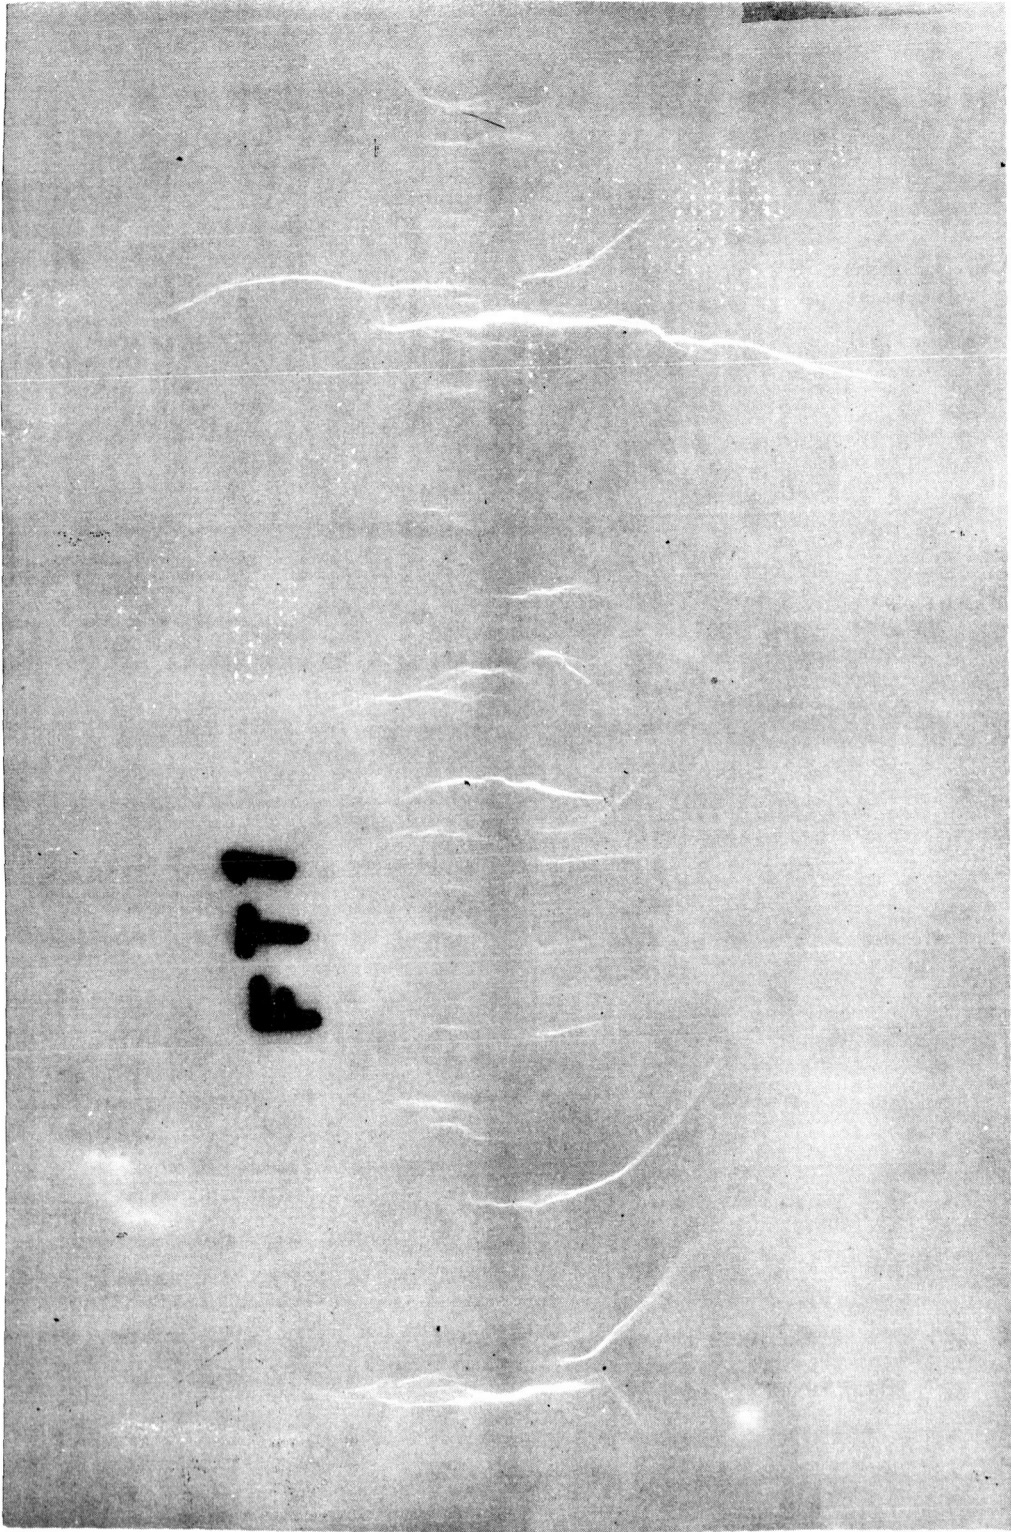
Radiograph of Butt-Welded Specimen Made with a Commercial Low-Alloy High-Strength Steel Plate After Stress-Corrosion Cracking Test for 31 Hours
